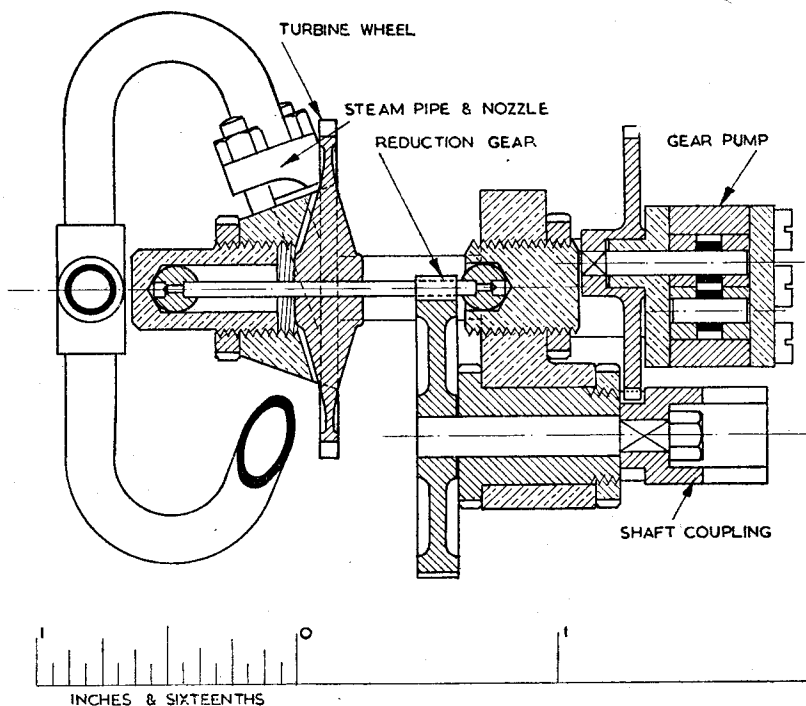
The turbine as first constructed with a flexible shaft and epicycloidal gears
